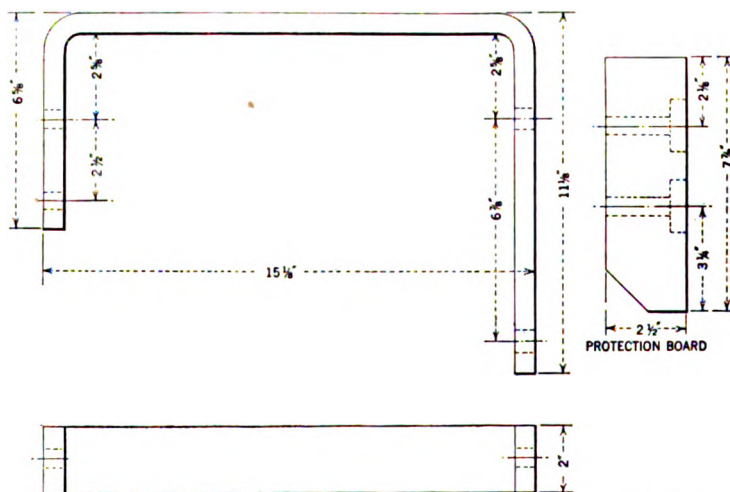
DETAIL OF THIRD RAIL PROTECTION BRACKET
